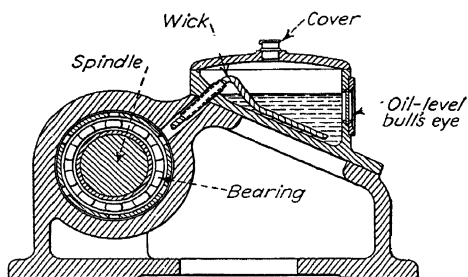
Wick-feed oiler applied to a high-speed, precision-grinder spindle.
